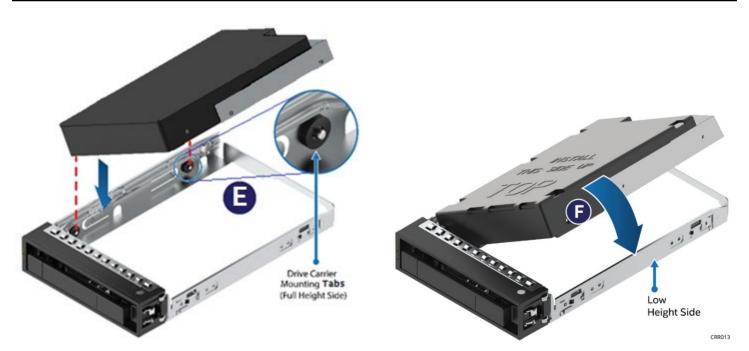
3.5" Drive Carrier to 2.5" SSD Bracket - Mount Bracket Assembly to Carrier
